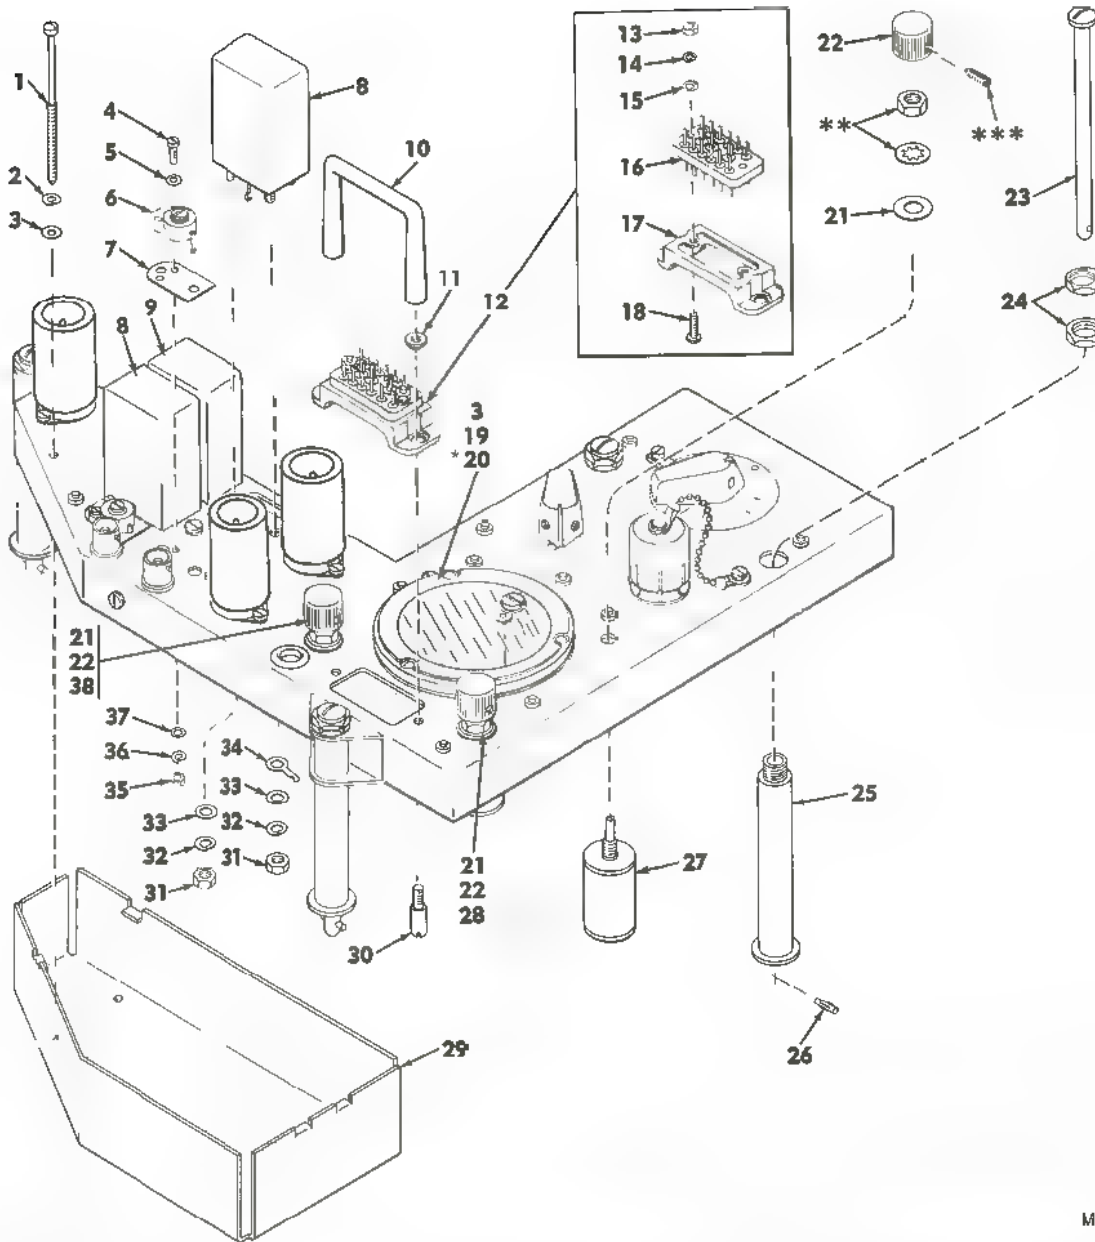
CONTROL, RECEIVER C-14968/M /8607339/-PARTIAL EXPLODED VIEW
